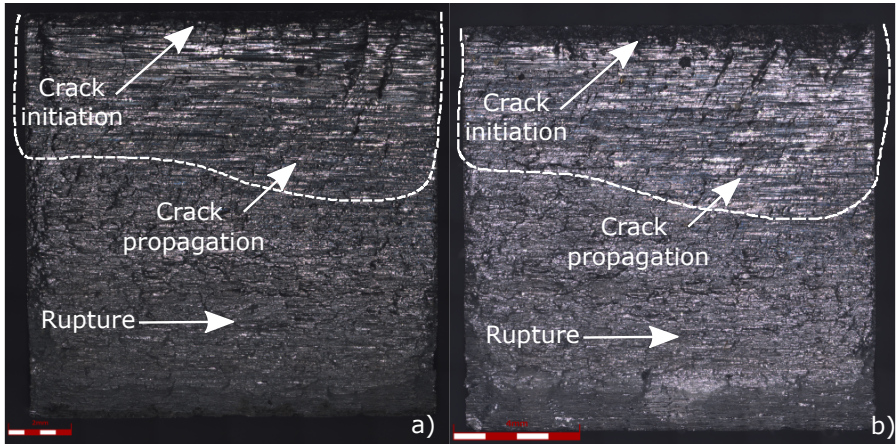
The fracture surface of the fretting fatigue specimens FF2 (a) and FF19 (b).
